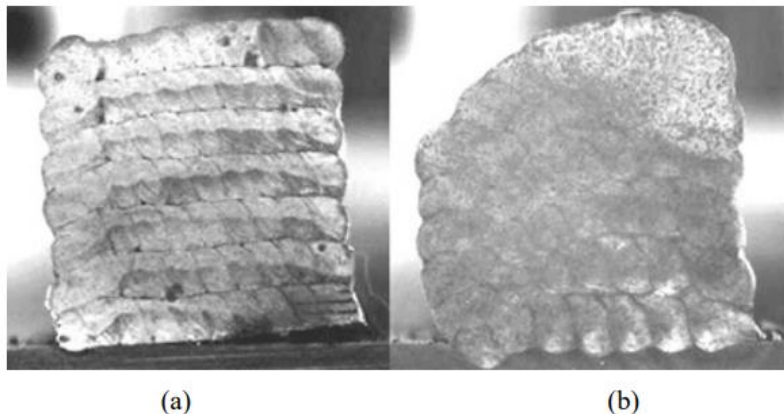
Cross sections of low-quality solid parts produced using thin wall offsetting technique (a) Showing lack of fusion due to inadequate heat input, but little loss of shape (b) showing loss of shape due to excessive heat input, but with good fusion. Jacono, S. F. (1999)
